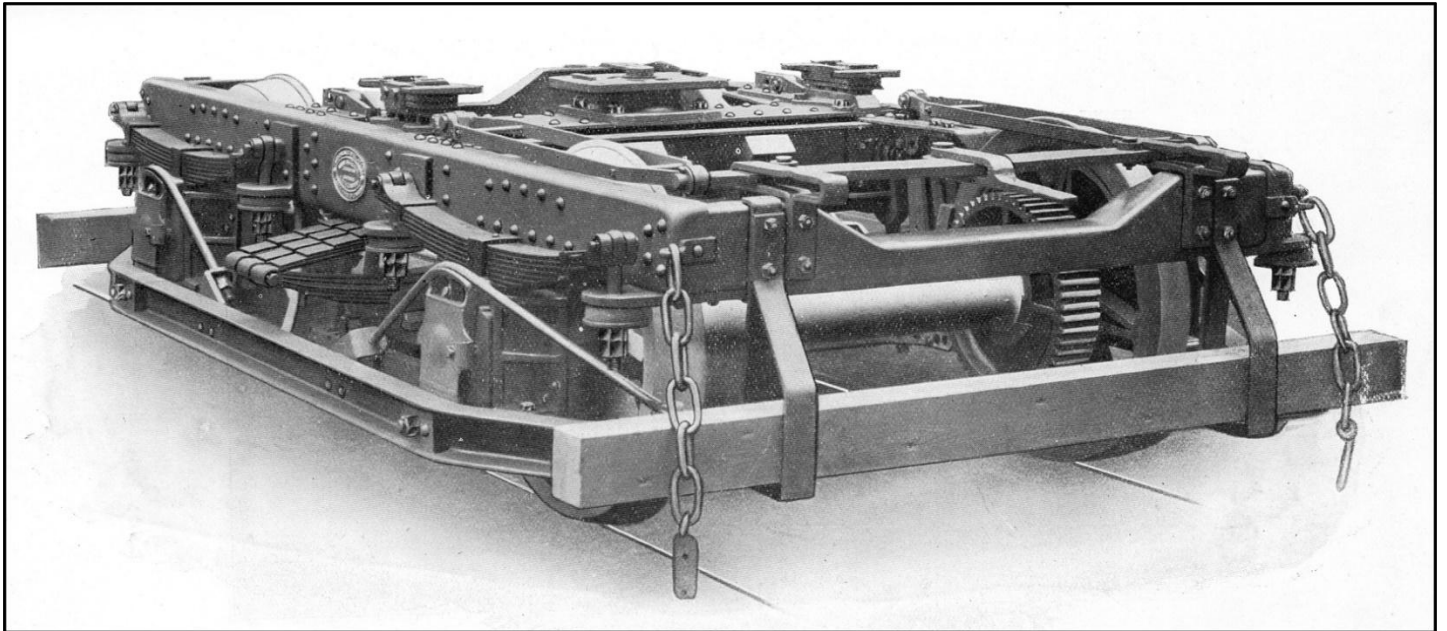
A photo of a Met. Railway 1904 pressed steel motor bogie, before the fitting of motors and shoe gear. The gear wheel for the motor can clearly be seen on the nearest axle. The curved edges of the frame members, typical of pressed steel, can be seen on the corners. Both axles had motors. The wooden shoebeams are mounted across the end of the bogie frame, supported by channel steel beams hung from the axleboxes. Note how additional security for the beam is provided by the looped straps suspended from the bogie headstock. The shoes were attached to the wooden beams, a positive shoe at each end and a negative shoe in the centre. The safety chains hanging from the bogie frame were secured to the car underframe to prevent the bogie separating from the car in the event of a derailment. The laminated bolster springs originally fitted are clearly seen protruding from the centre of the bogie. Photo: Tramway & Railway World.
